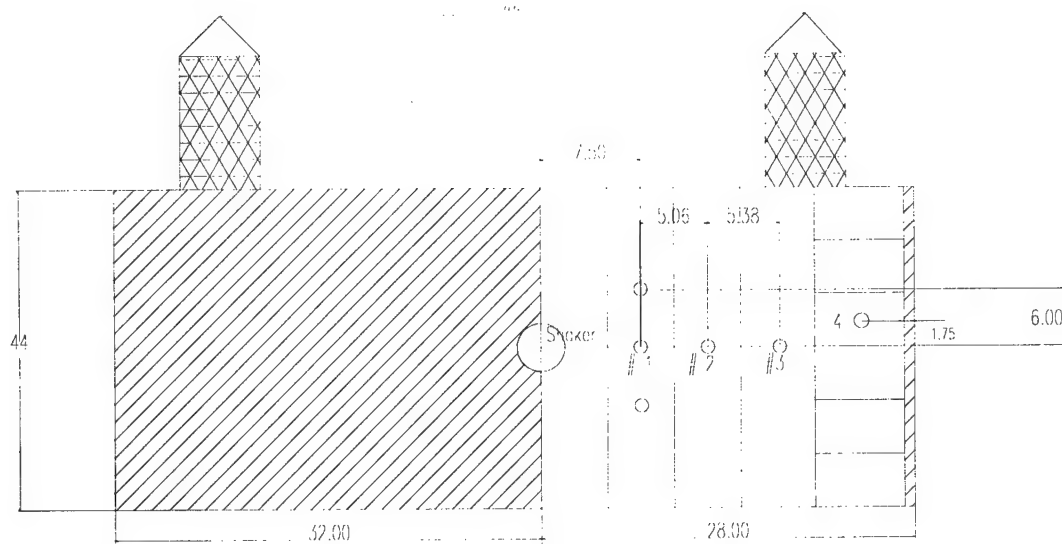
Internal half section view of UUV cylinder. Accelerometer locations are with respect to the shaker. All dimensions in inches.
